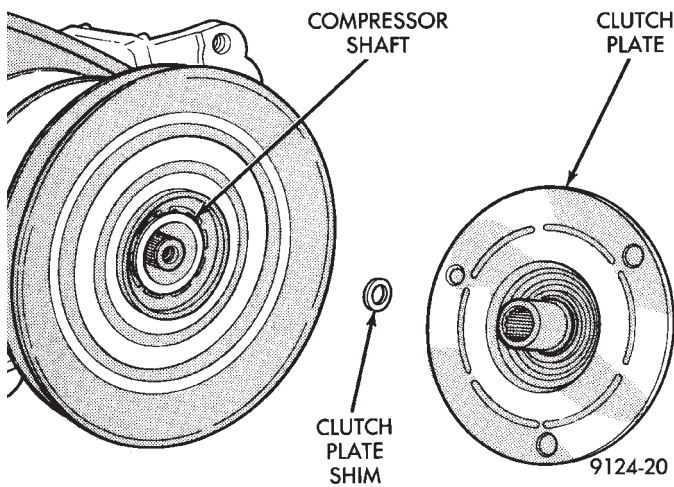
Compressor Shaft Bolt and Clutch Plate
